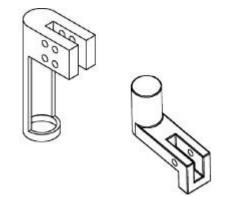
Valve Spring Compressor Adapters 8519 Courtesy of CHRYSLER LLC
